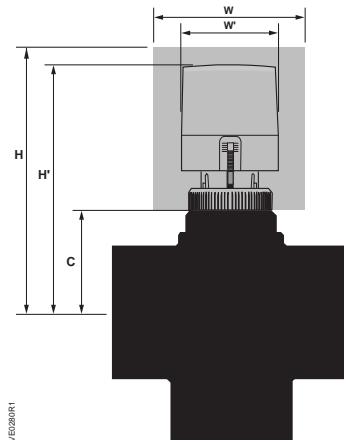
ESZ7F2 Thermic Actuator: 3-Way Valve Assembly Service Envelope.
